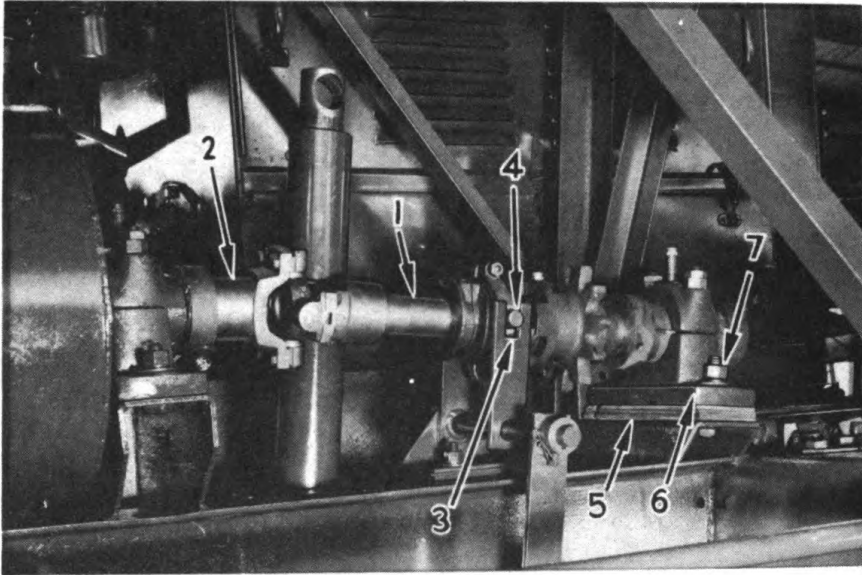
"COLD ELEVATOR EXTENSION DRIVESHAFT."
